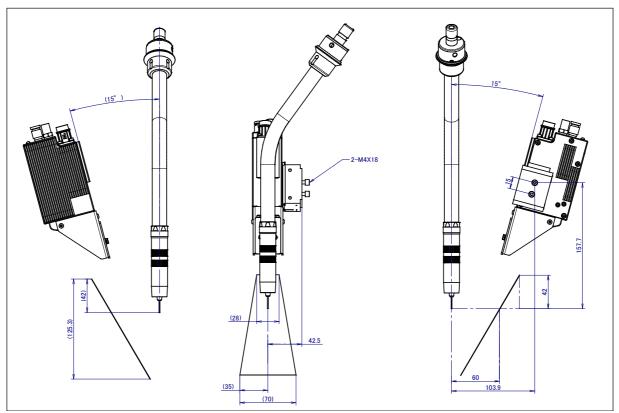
(c) Recommended installing dimension (FUJI-CAM 2.0)
